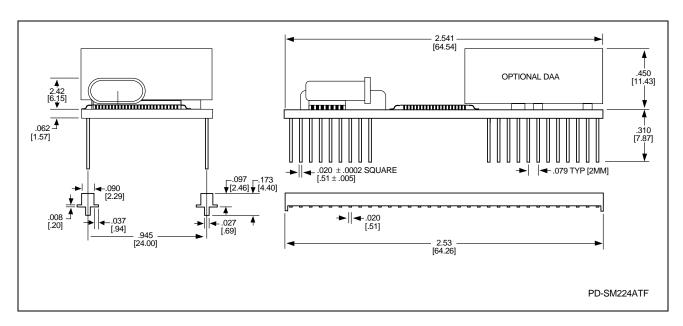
SocketModem Physical Dimensions - SM224ATF
